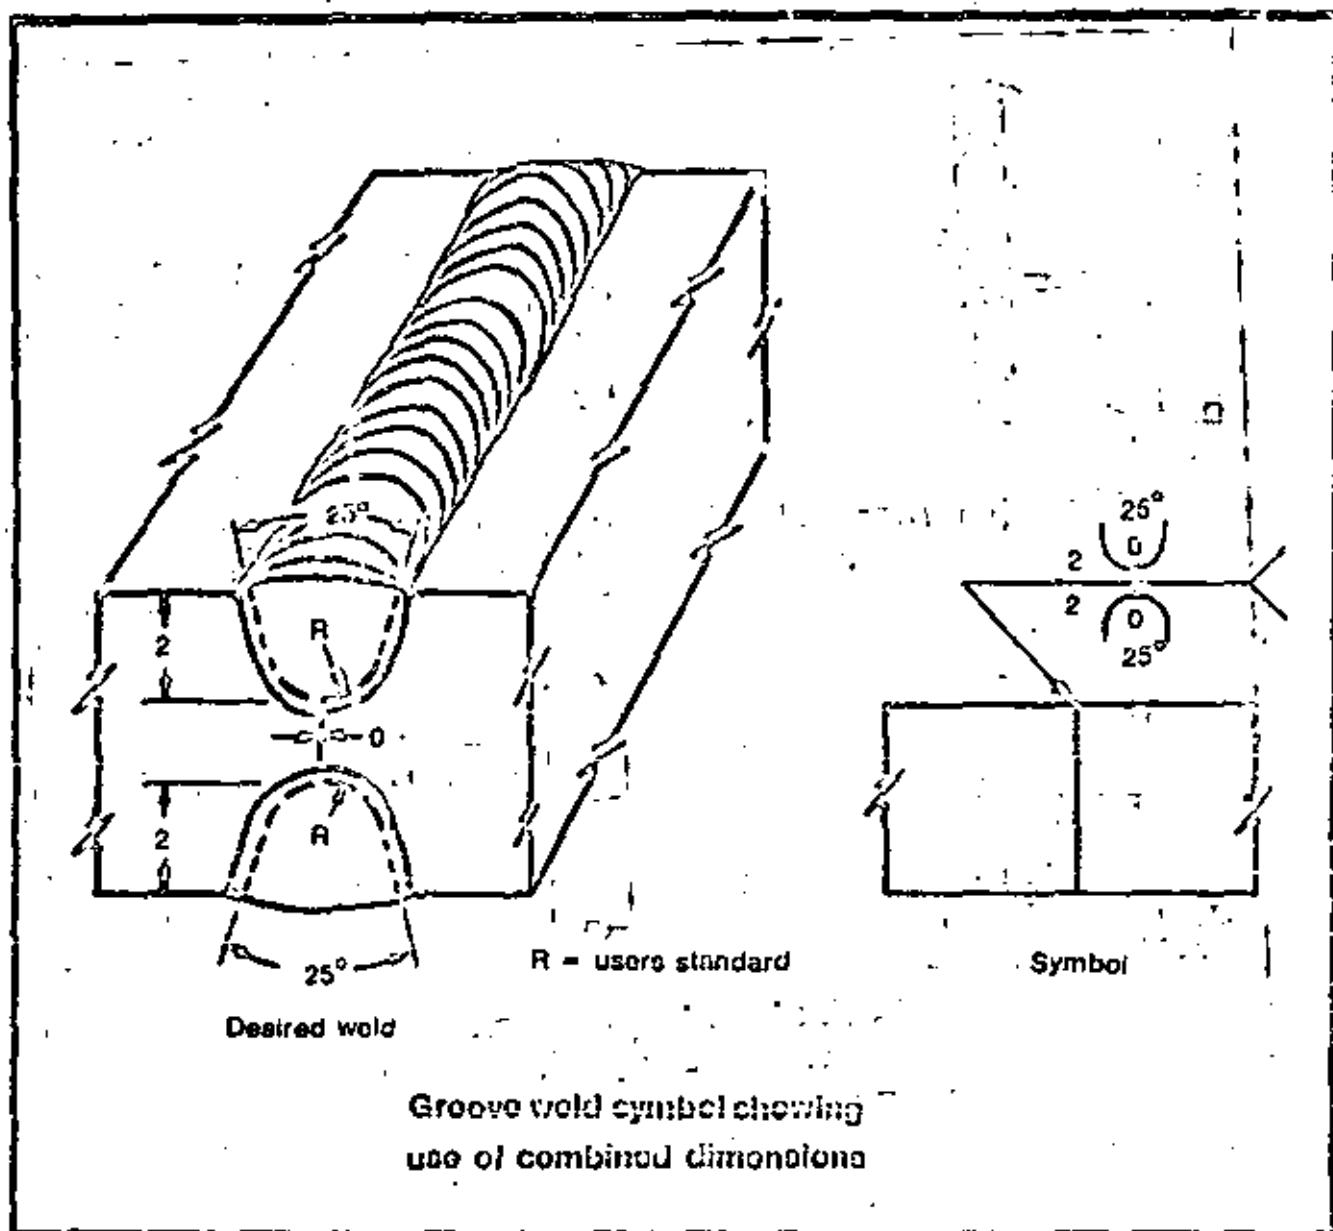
Application of dimensions to groove weld symbols.
